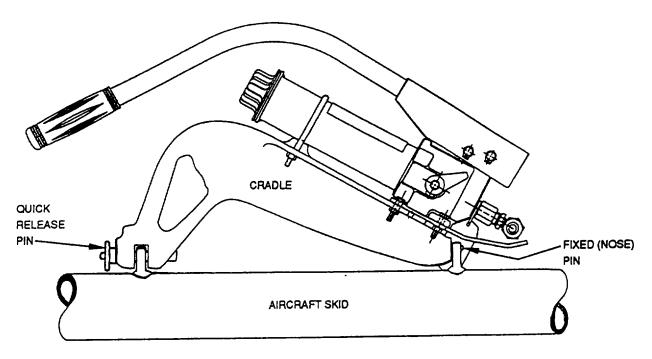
Mechanical Connection Components, Model 1730-EG-100
